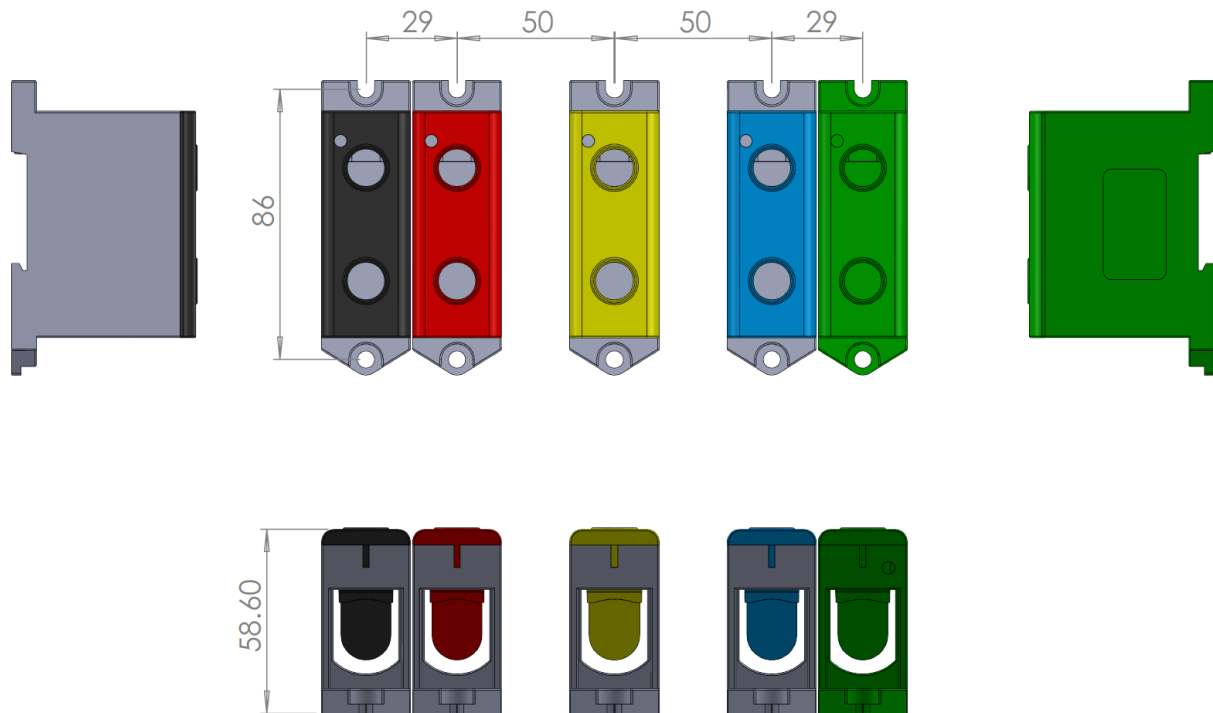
Perspective Drawing of Outgoing (Consumer) Terminal Block Assembly
